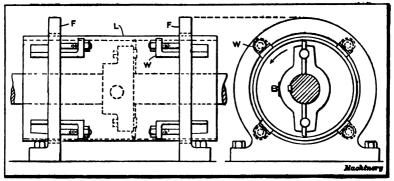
Cylinder Lining Mounted in Fixture for Boring
